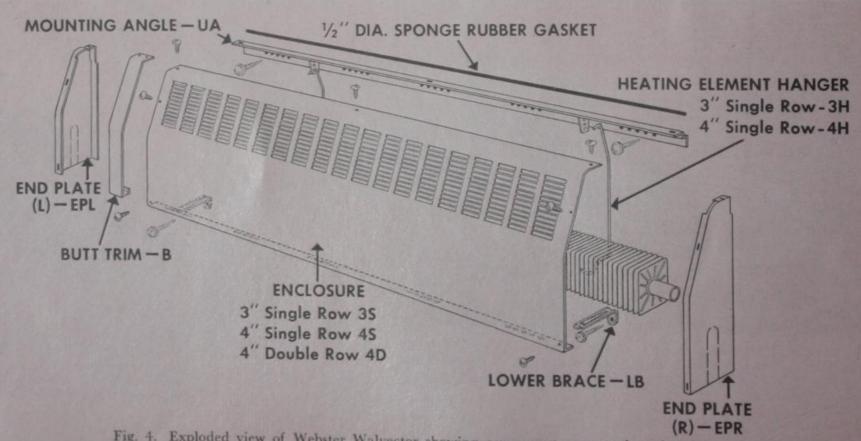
Exploded view of Webster Walvector showing component parts and symbol for each.
